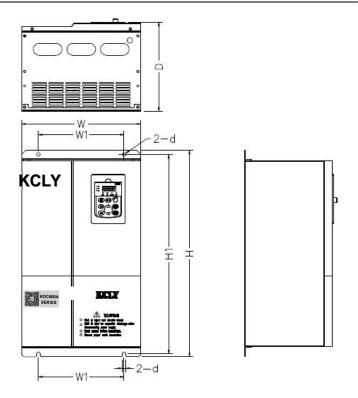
Appearance and installation dimension of KOC680 series [old product] (Metal housing structure)
